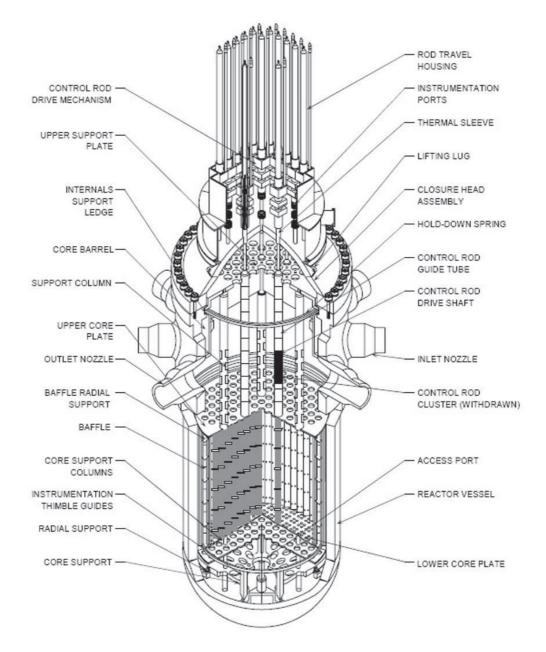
A PWR pressure vessel with fuel assembly and various reactor components (Courtesy of [34]).
